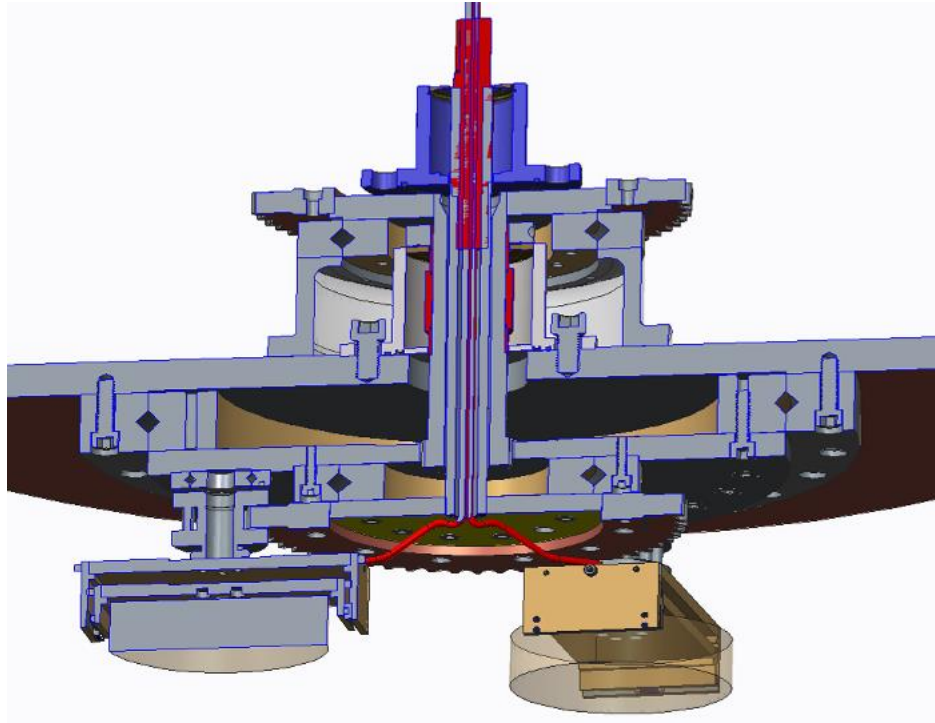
Cutaway of the internal planetary design for the APS rotary deposition system. The base above where the nested ferro-fluidic feedthrough is mounted to is the outer rotation axis. The substrate motor will be mounted to this surface. Roller bearing guides are used for all axes of rotation.
